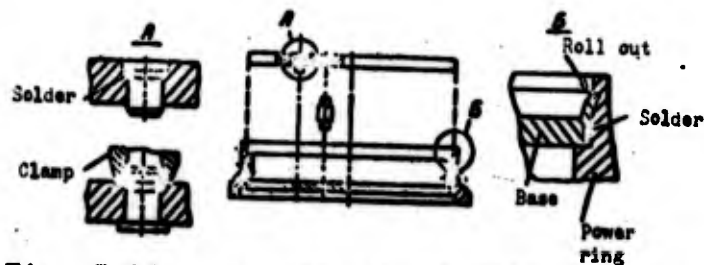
Diagram of the assembly of an injector subassembly.
